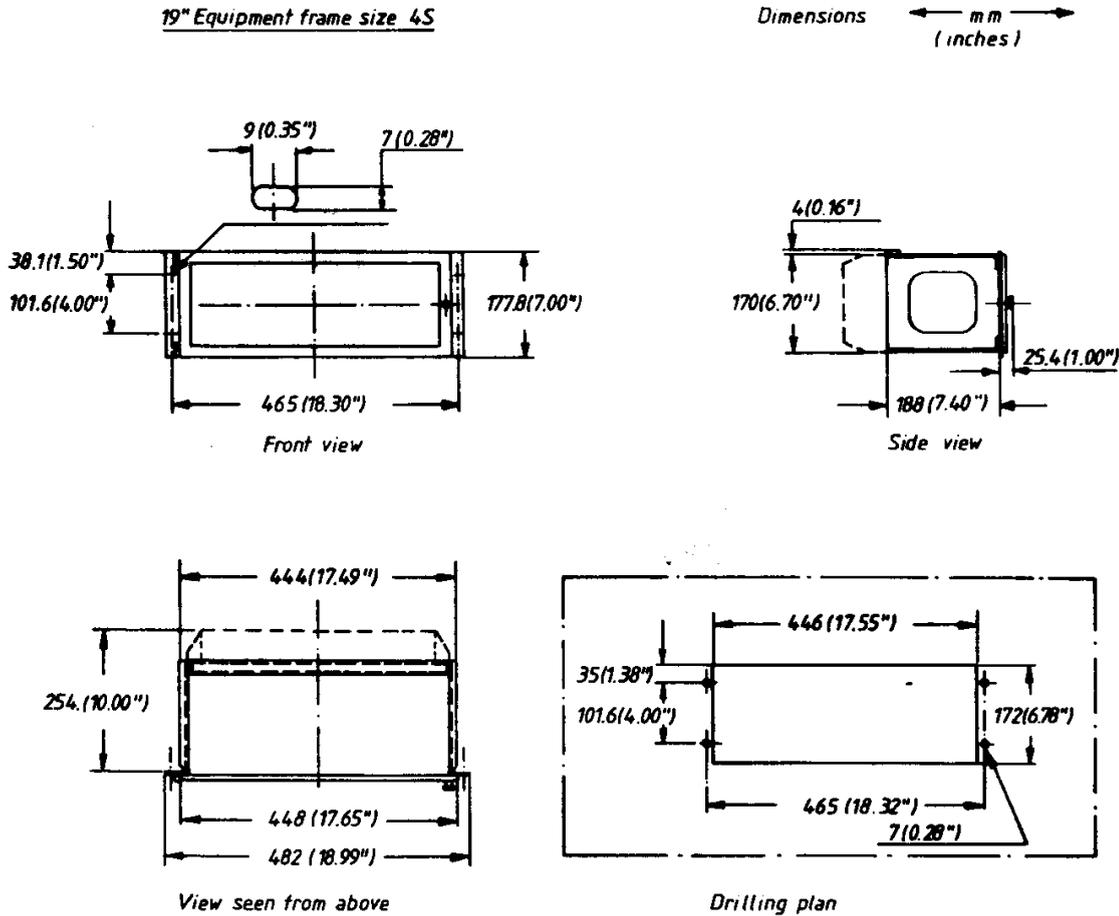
Physical dimensions of 4S 60C equipment, panel drilling and cutout.
